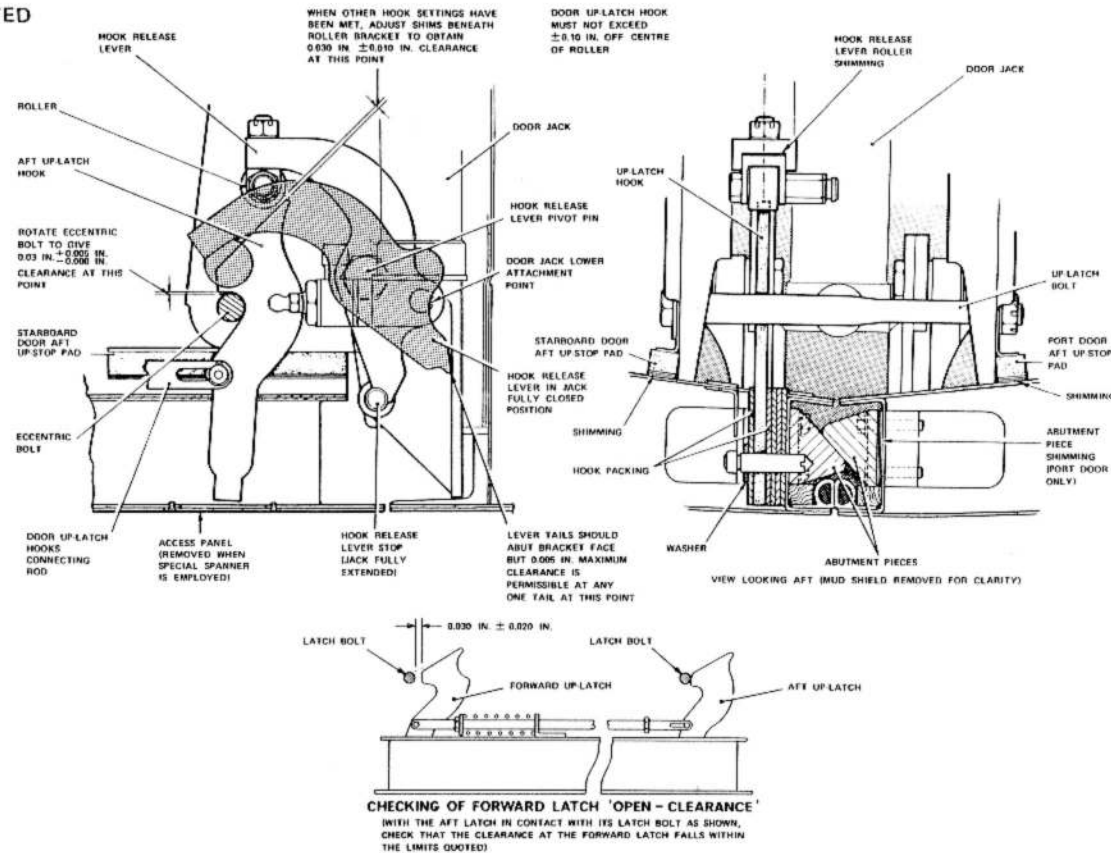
DOOR AFT UP-LATCH HOOK SETTING
